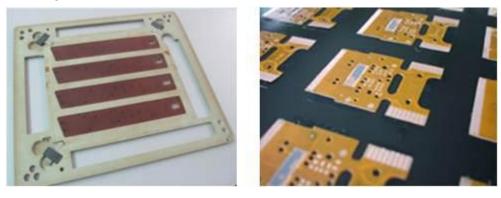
example of flexible PCBs mounted on adhesive fixtures
